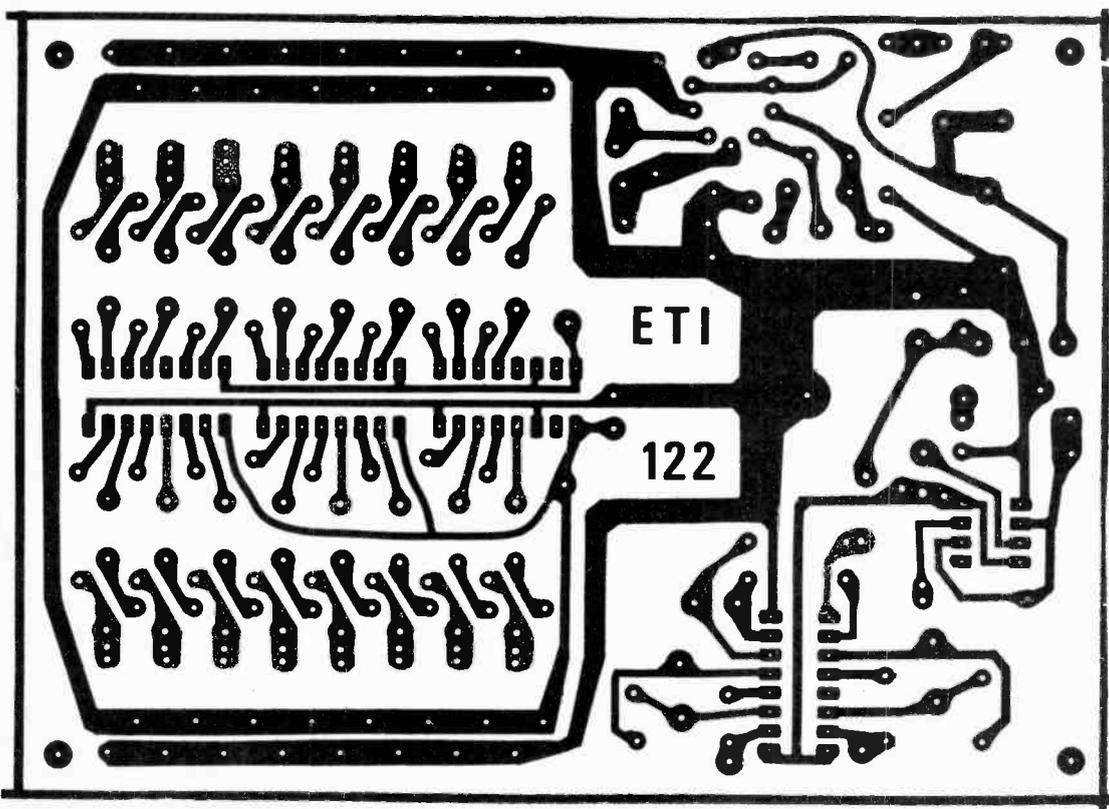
Printed circuit-board artwork. Full size 142 x 104 mm.
